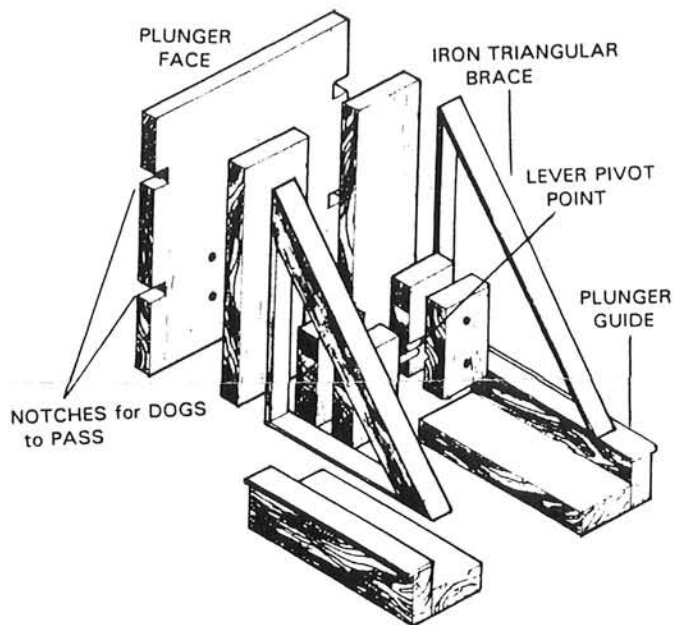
An exploded view of the plunger mechanism (Debra Reich, 12/92)
